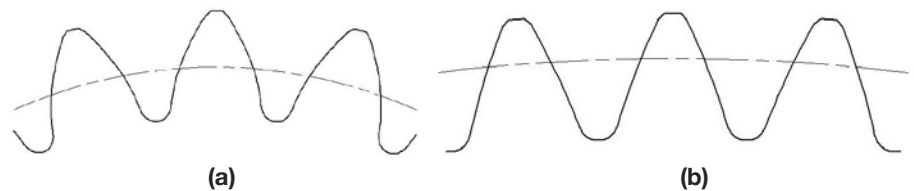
Symmetric gear tooth profiles; (a)—24-tooth pinion, (b)—83-tooth gear.
